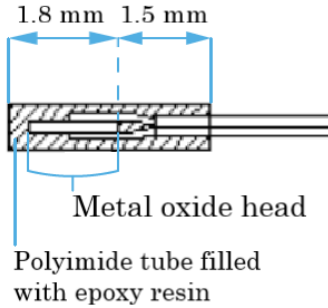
Dimensions of inner components of NTC sensor. Figure adapted from [34]
